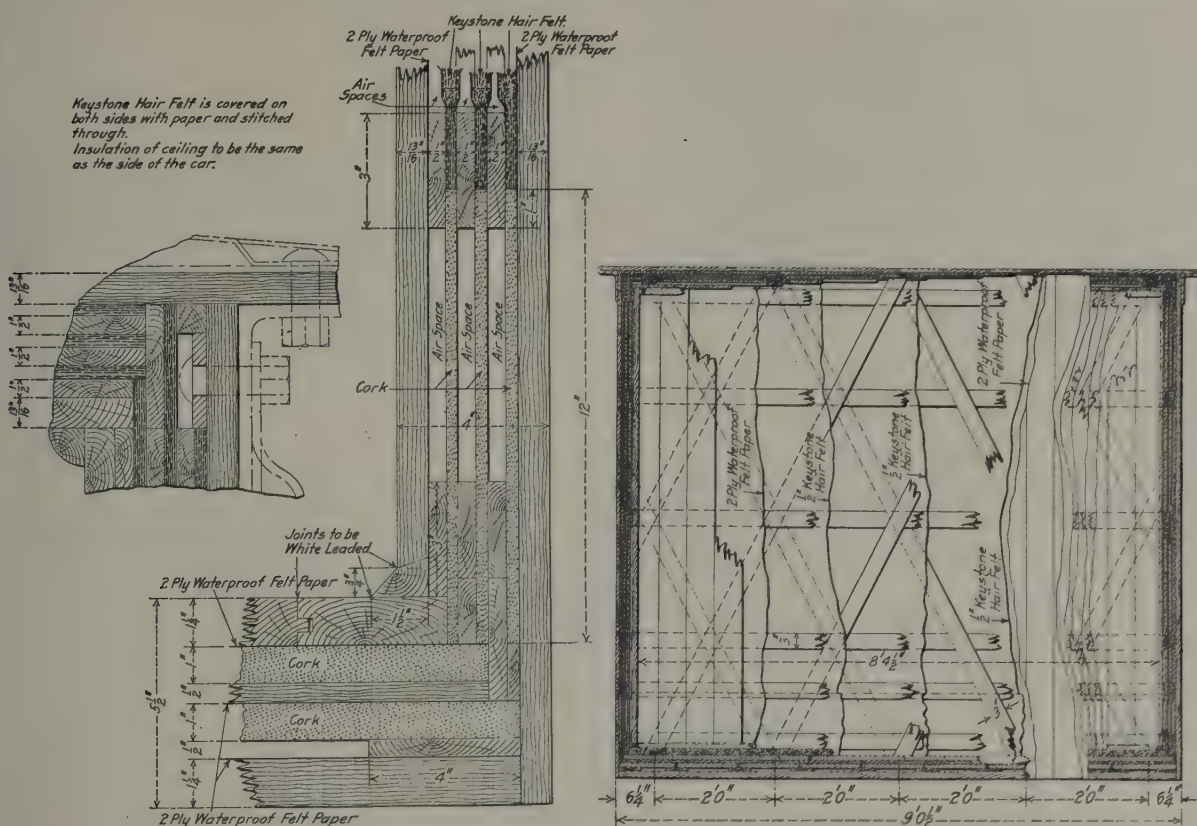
Insulation Details for Pennsylvania Railroad Steel Frame Refrigerator Cars.
